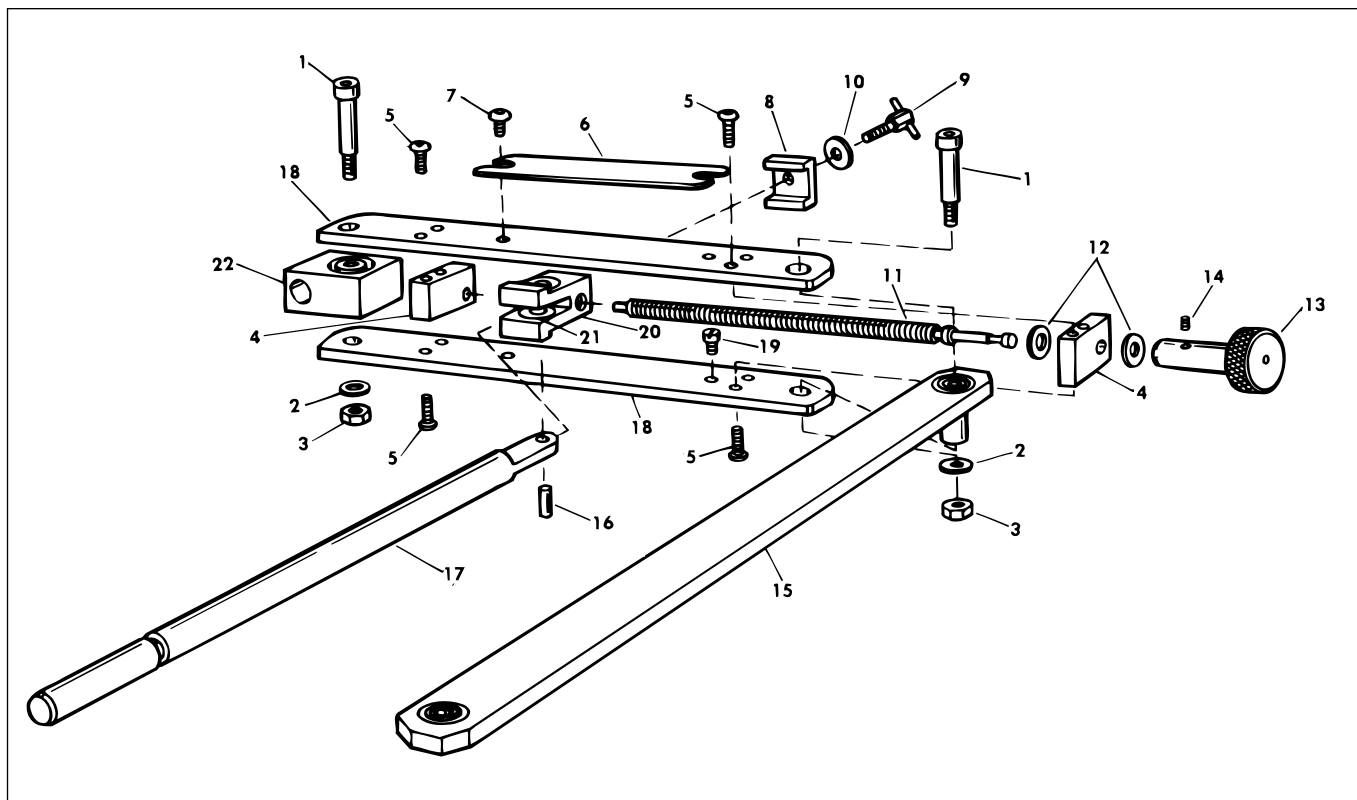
FIGURE L - TUBE & SHAFT ASSEMBLY
